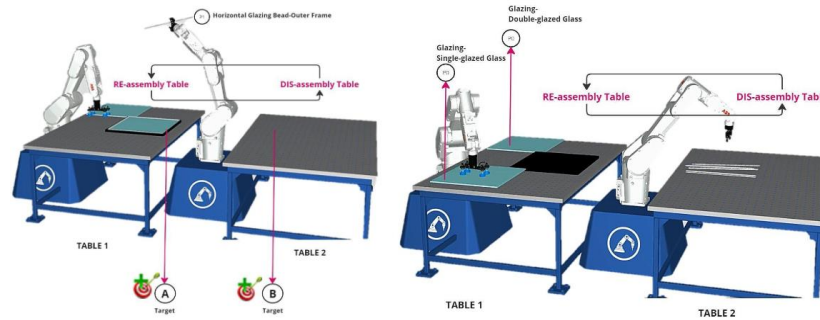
Left: Disassembly path between RE-assembly - DIS-assembly Tables for P1
